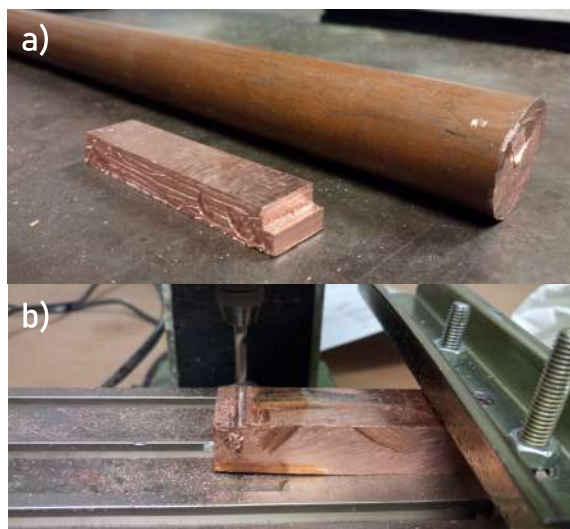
(a) Copper block round stock before machining it (right) and after (left). (b) Hand mill machining during mechanization process.
